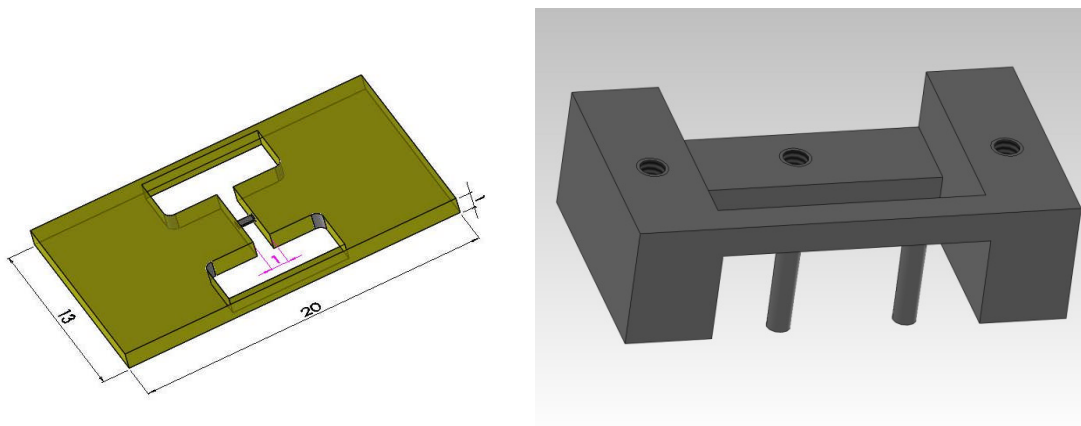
The tensile test specimen (left) and the clamping device (right)
